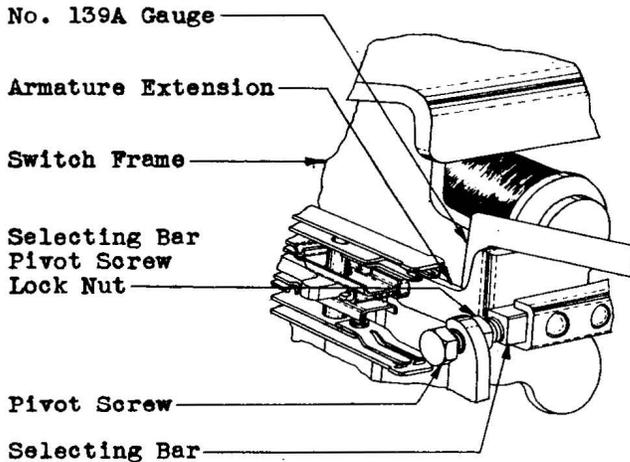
Fig. D - Method of Checking Clearance Between Wide Portion of Selecting Armature Extension and Switch Frame
